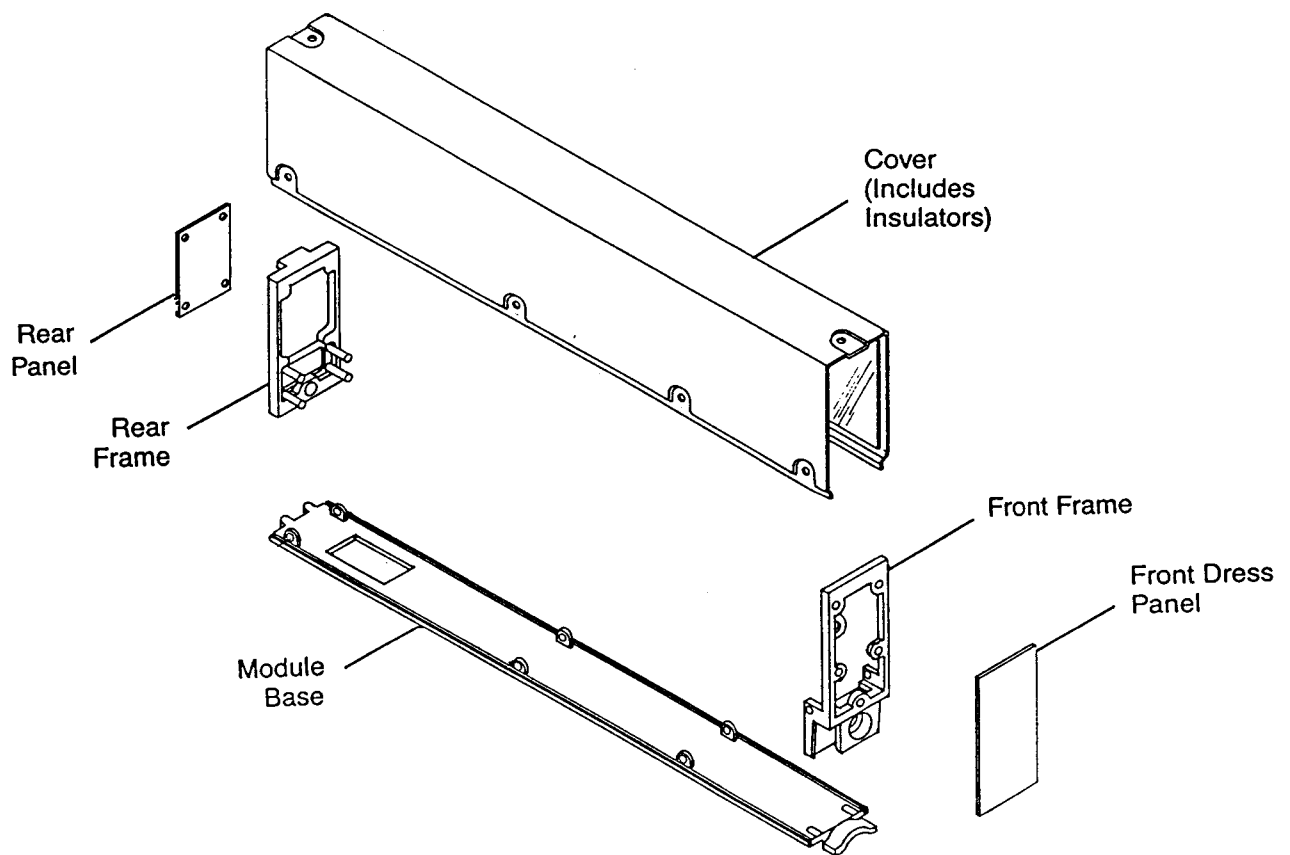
Module Parts Kit: Typical Major Chassis Components
